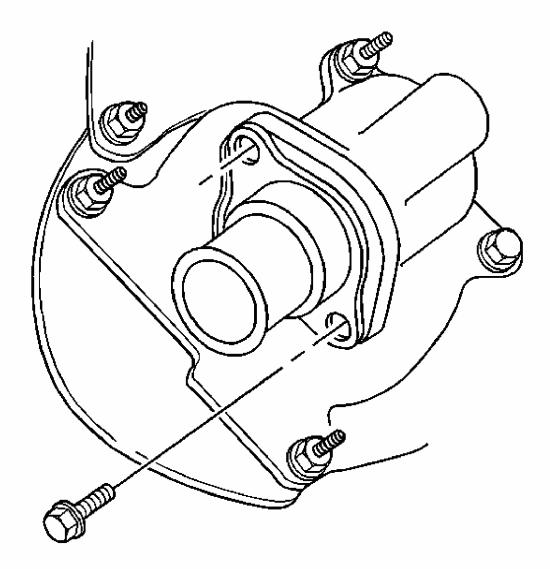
Identifying Thermostat Housing/Water Pump Inlet Bolts Courtesy of GENERAL MOTORS CORP.
